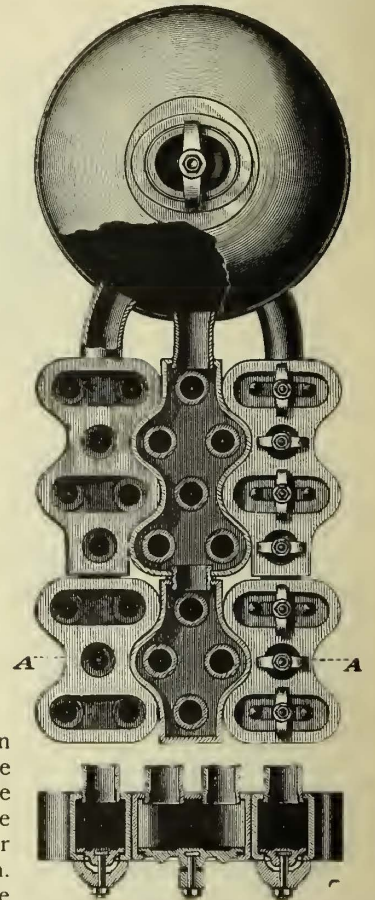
SECTION OF BANK OF HEADERS AND DRUM—SAFETY WATER TUBE BOILER.
